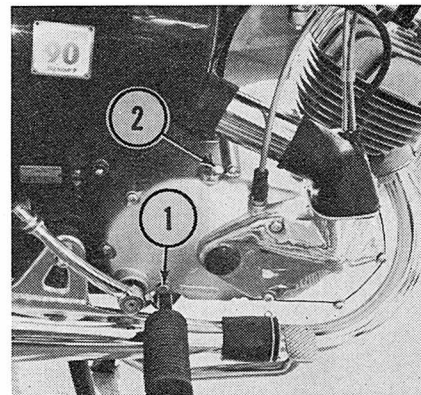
View of right side showing gear box oil level screw (1) and filler plug (2).
